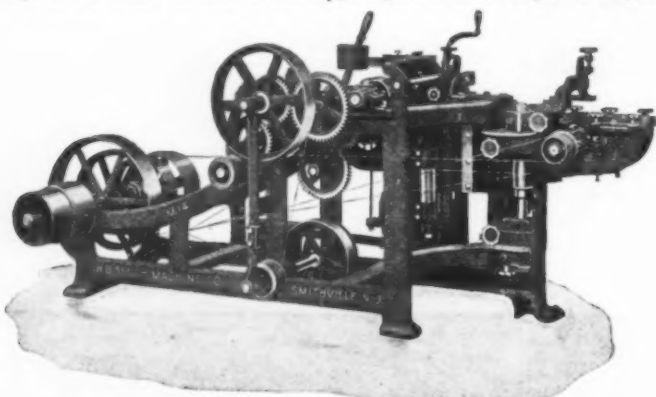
NEW SIX-INCH OUTSIDE MOLDER.
